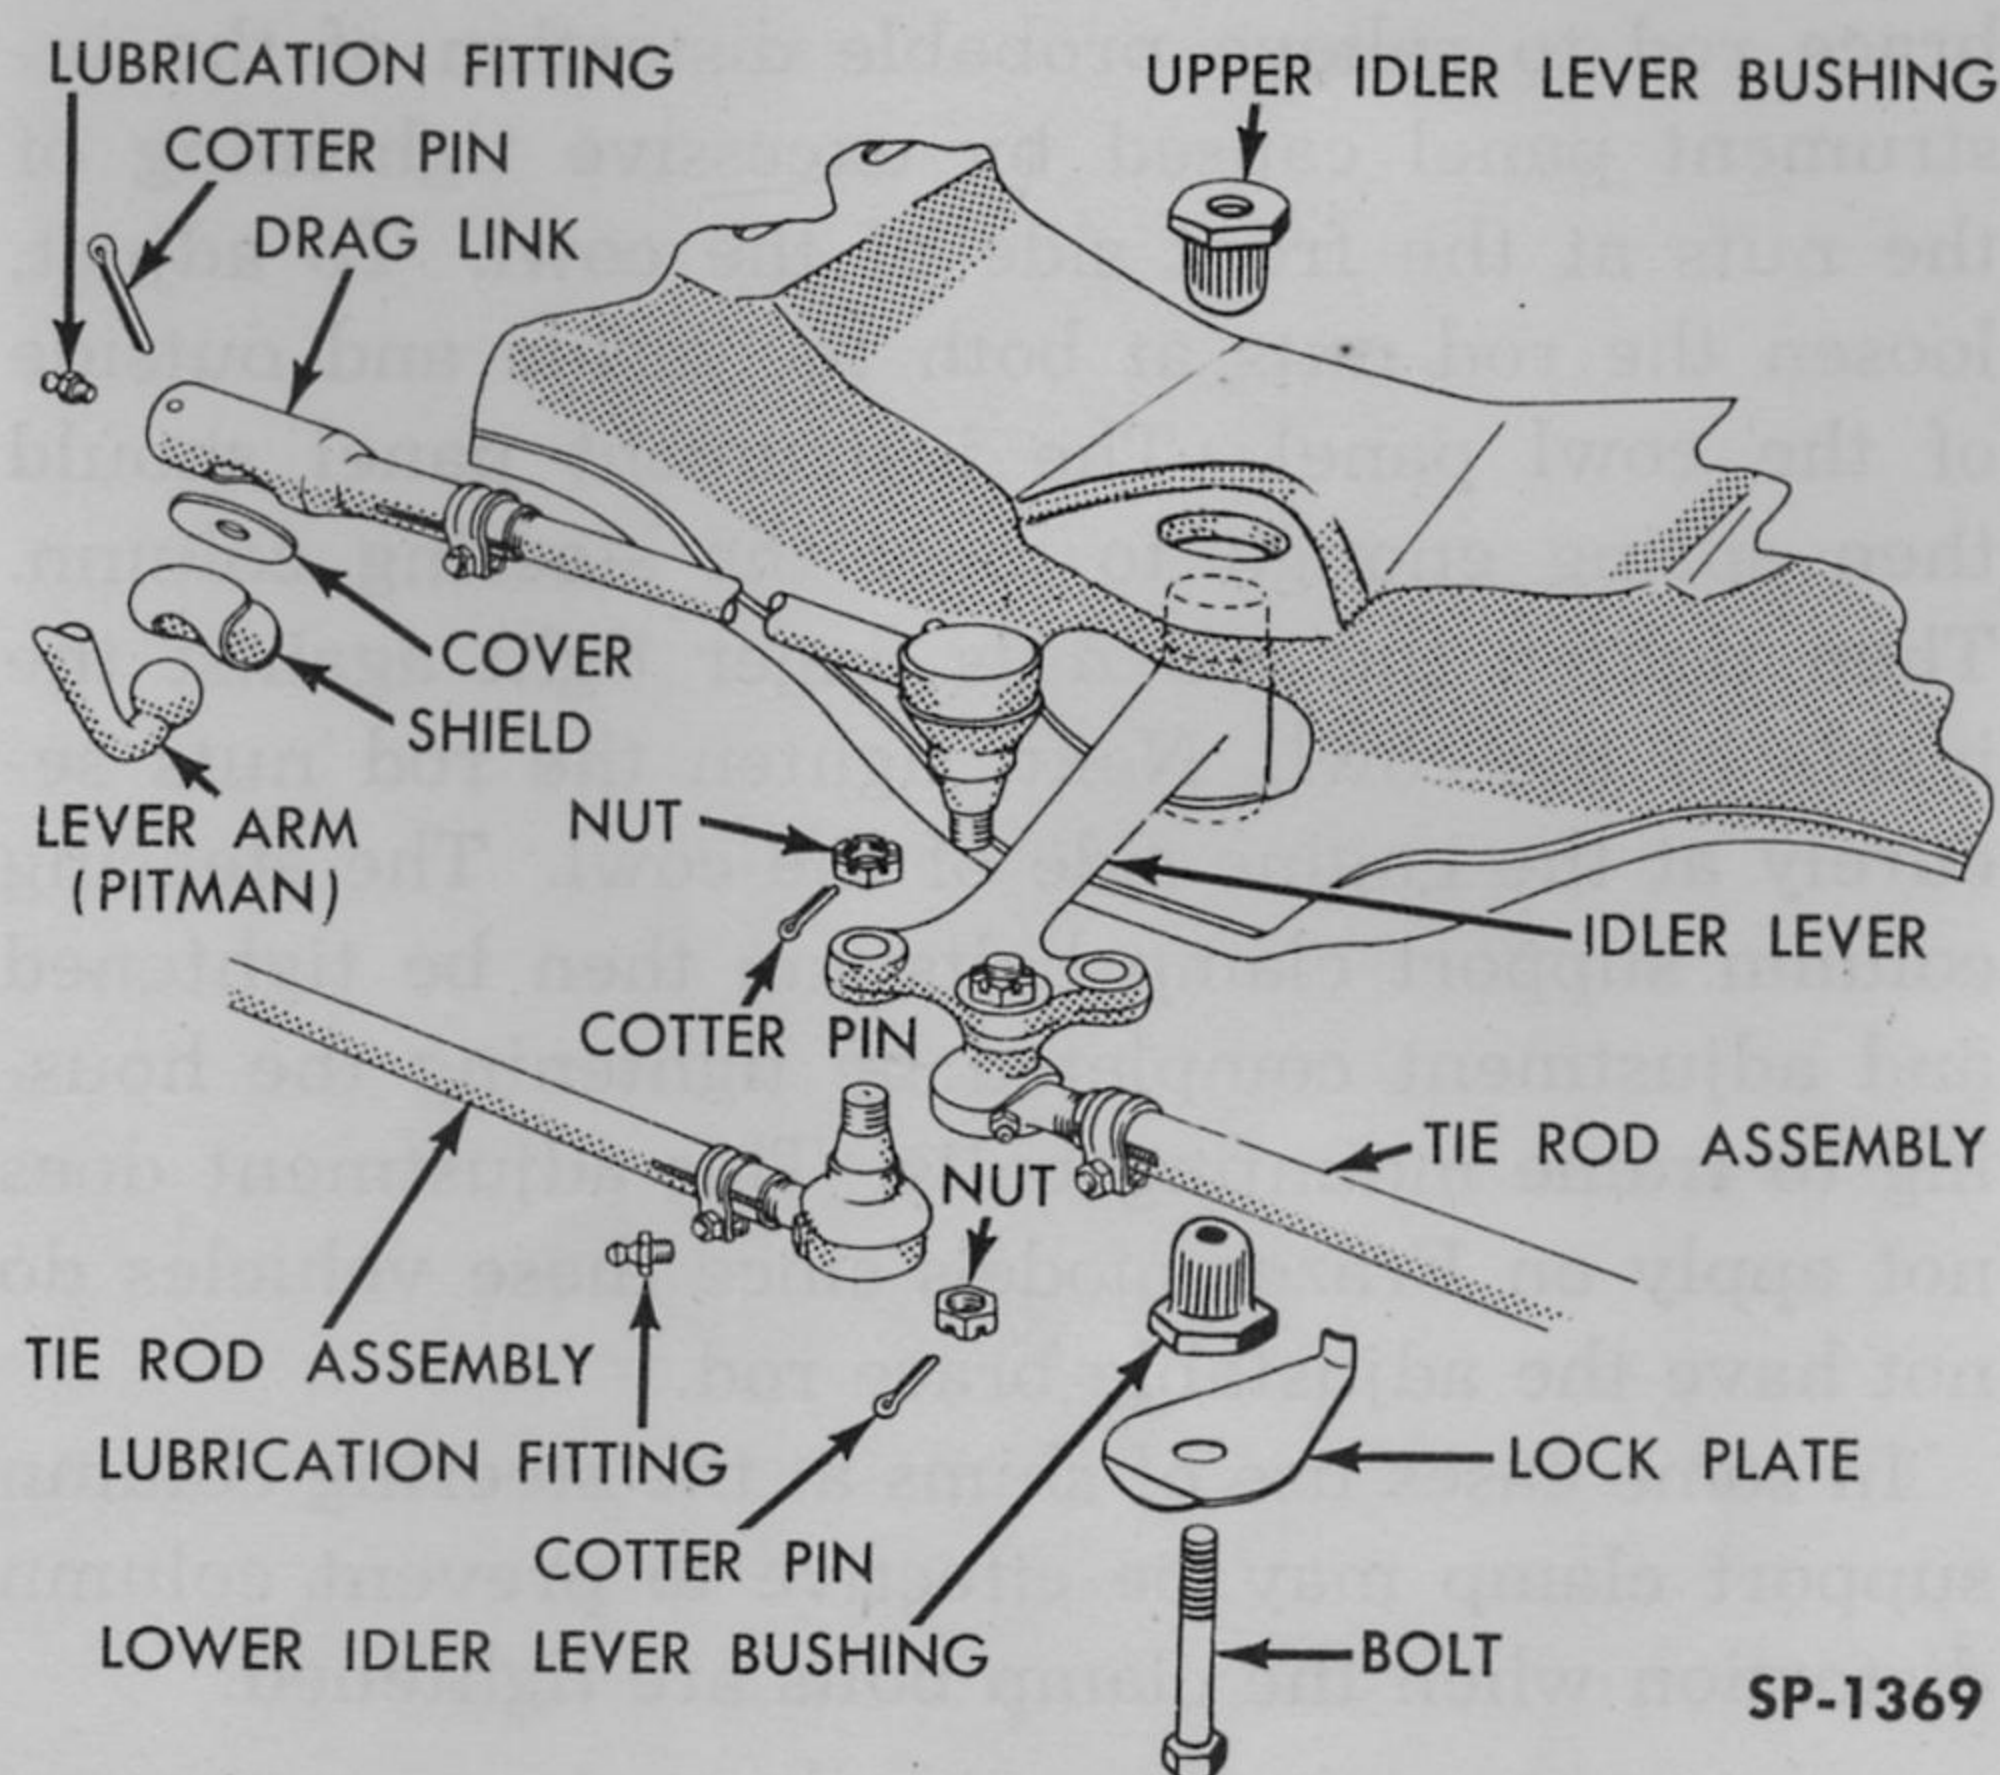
Steering Linkage Components at Idler Lever—Exploded View—Frazer
